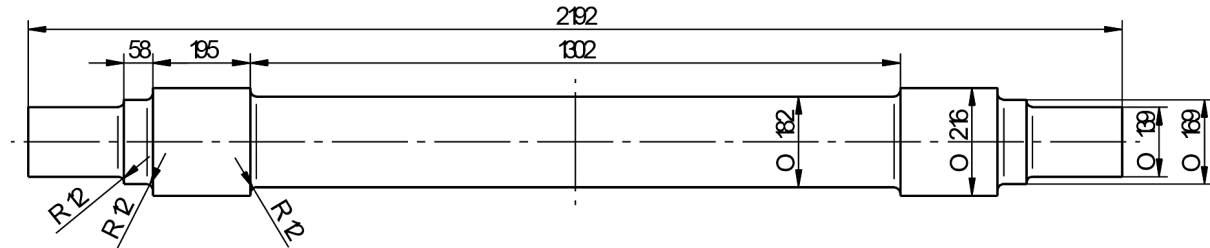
The BA3002-type railway axle (according to the EN1326 standard) with machining allowances
